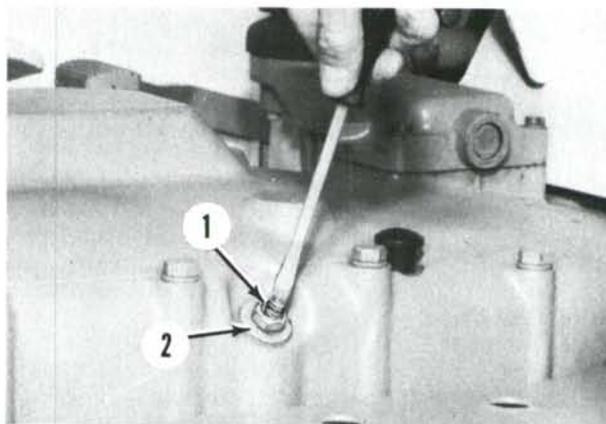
Remove adjusting screw (1) and plug (2) from left-hand side of transmission cover to gain access to rear planetary brake band adjusting nut.
